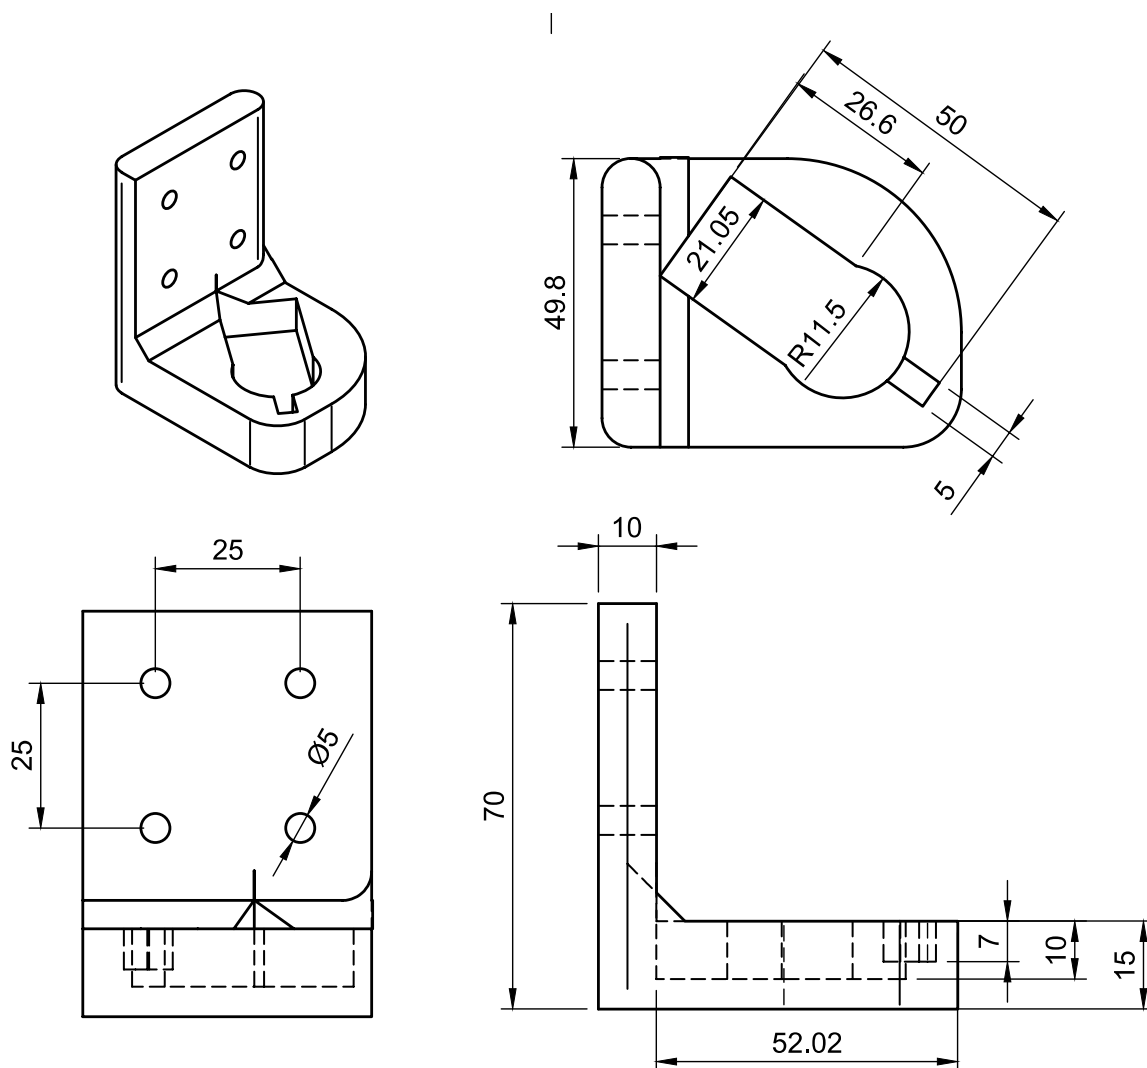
Technical drawings of the LRC holder designed for Balder, MAX IV Laboratory.
